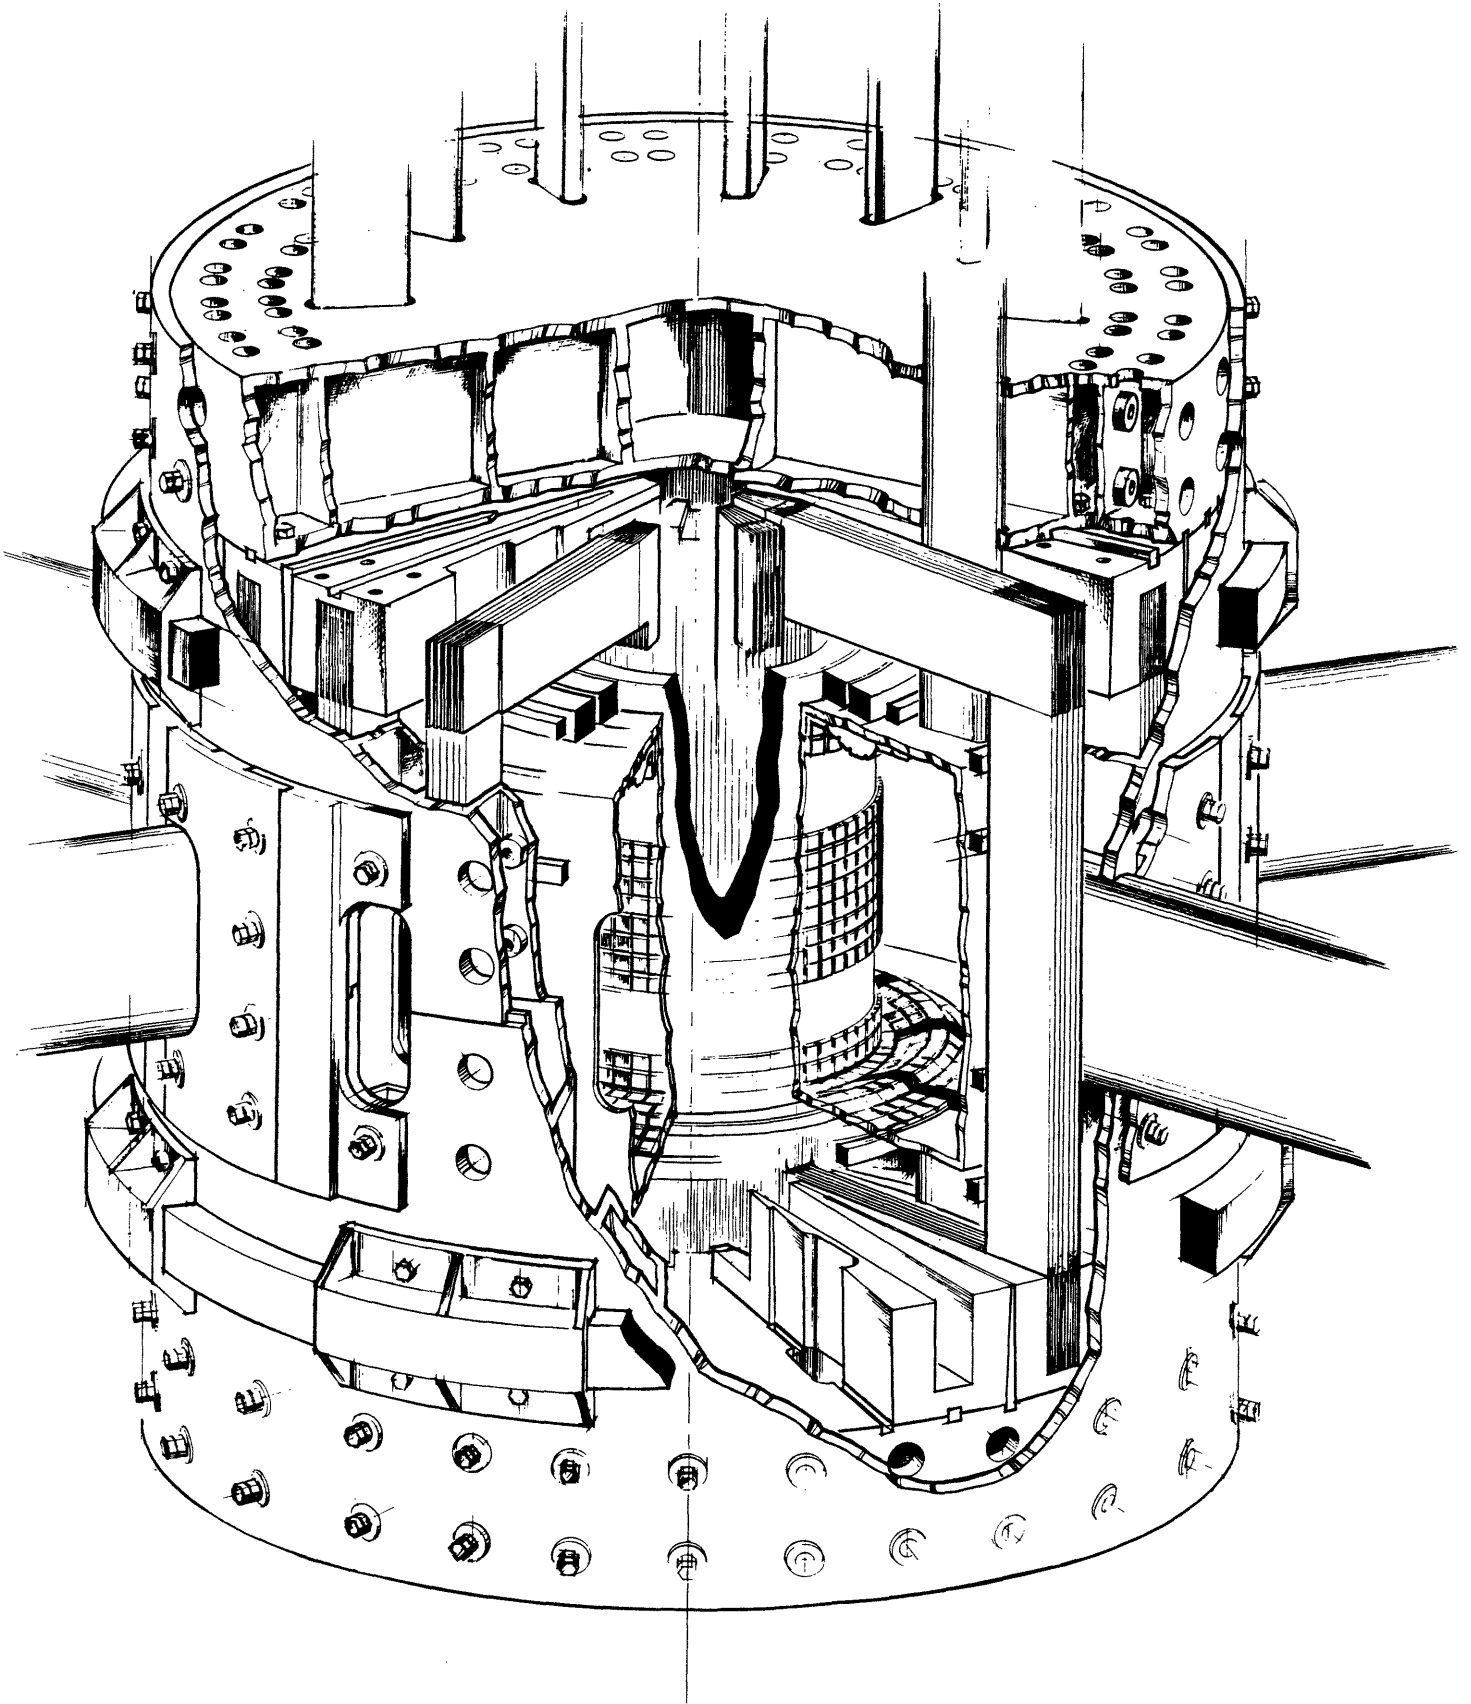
The Alcator C-MOD Design Concept: Isometric View
